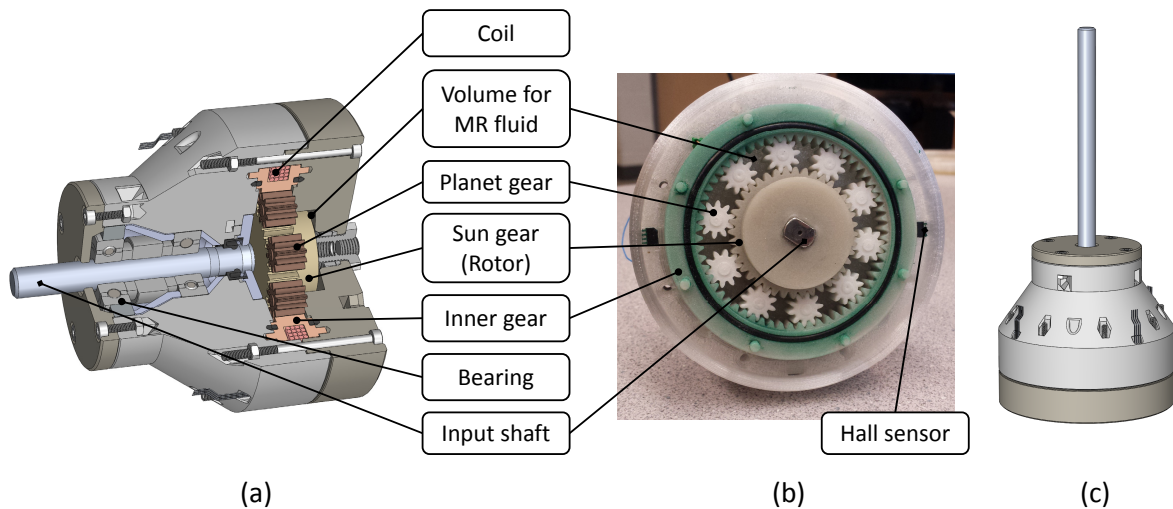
First prototype of the "Planetary" MR clutch: (a) - CAD model, (b) - Assembled planetary mechanism of the MR clutch prototype, (c) - overview of the assembled prototype.
